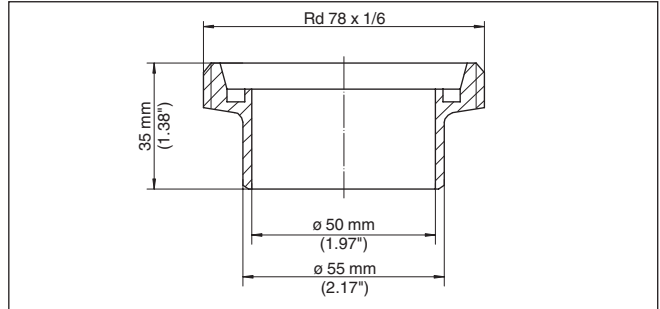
Dimensions of welded socket, slotted nut DN 50 (DIN 11851)
